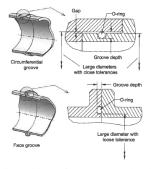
O-ring seal joint comparing circumferential with face seal dimensioning. The face seal's important dimensions are probably easier to manufacture.
